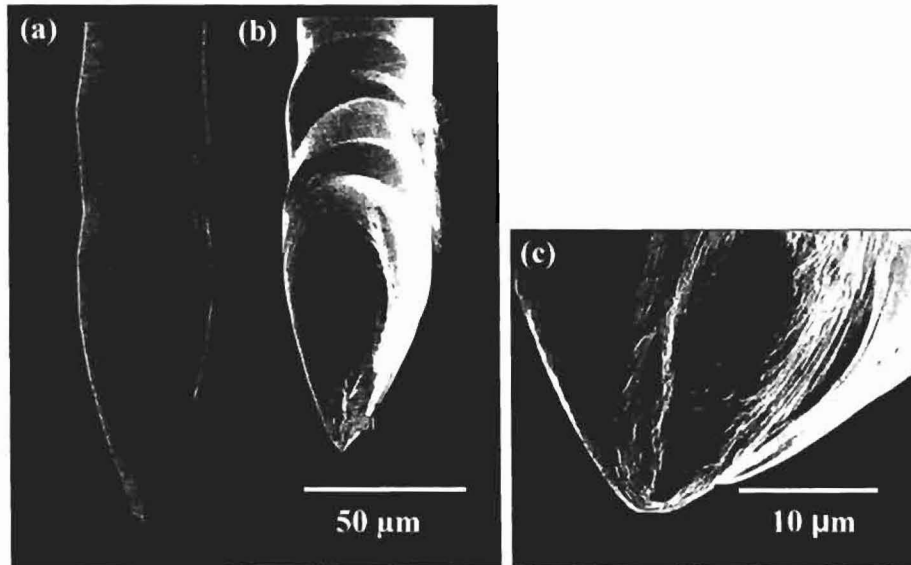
Scanning electron micrographs of the fracture specimen. (a) Side view, (b) oblique view and (c) tip of fracture surface.
